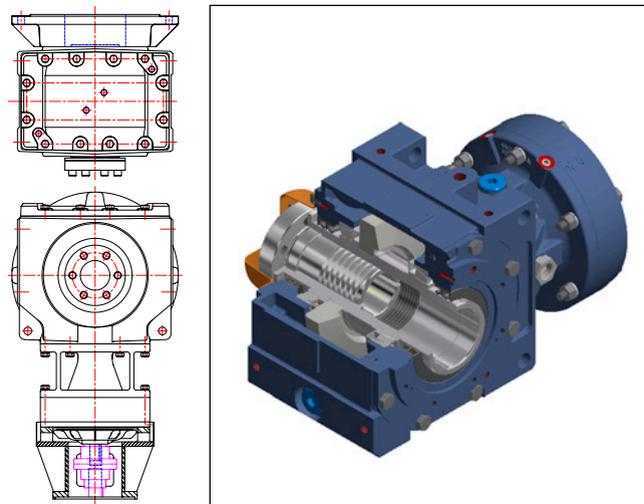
(left)—Flange-mount Bevel Buddy Box in horizontal position. Top: side view. Bottom: back view.
